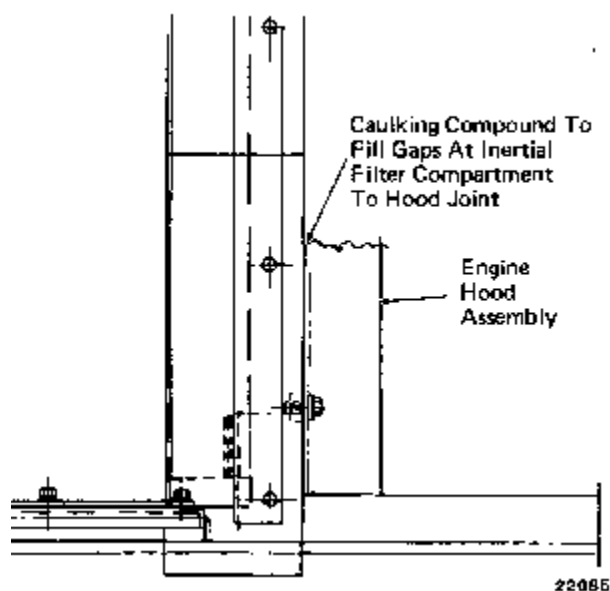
Cutaway Of Inertial Filter Compartment To Hood Joint Sealed With RTV
